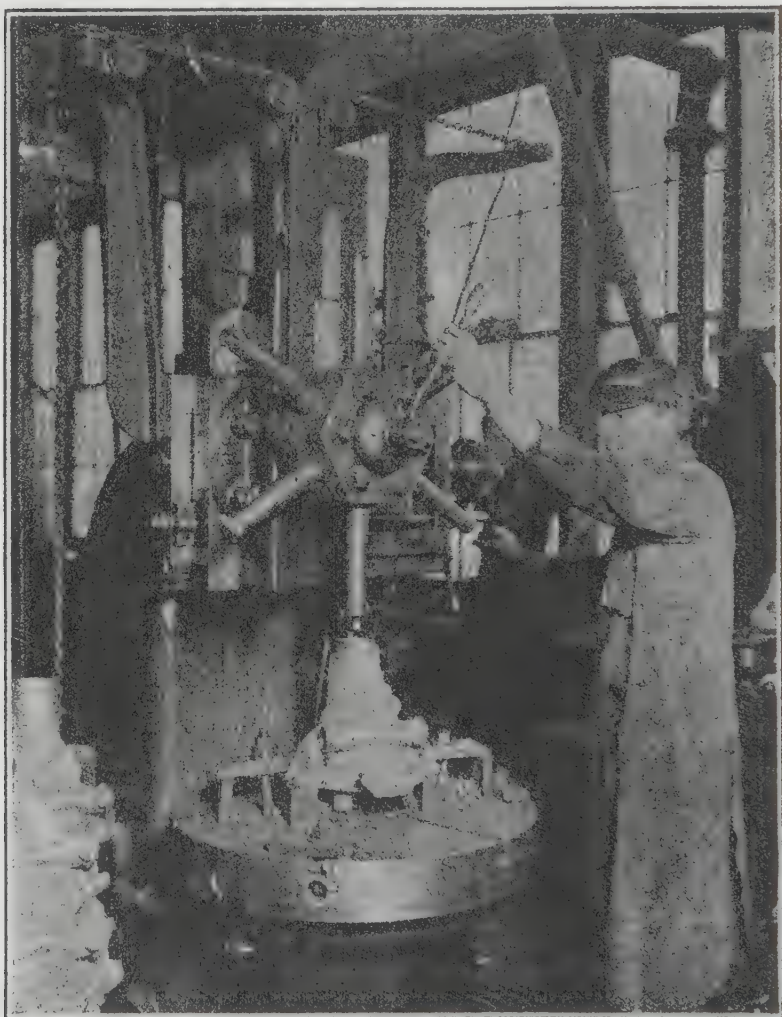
BORING GEAR CARRIER IN VERTICAL TURRET LATHE.
